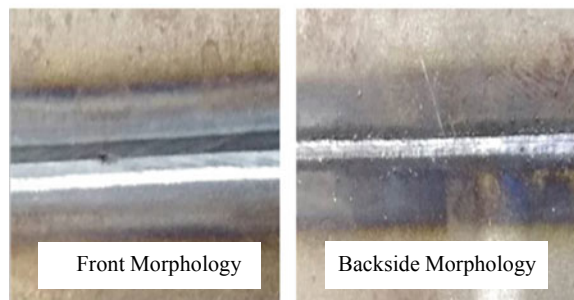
Weld morphology of 2 mm thick and low carbon steel plate
